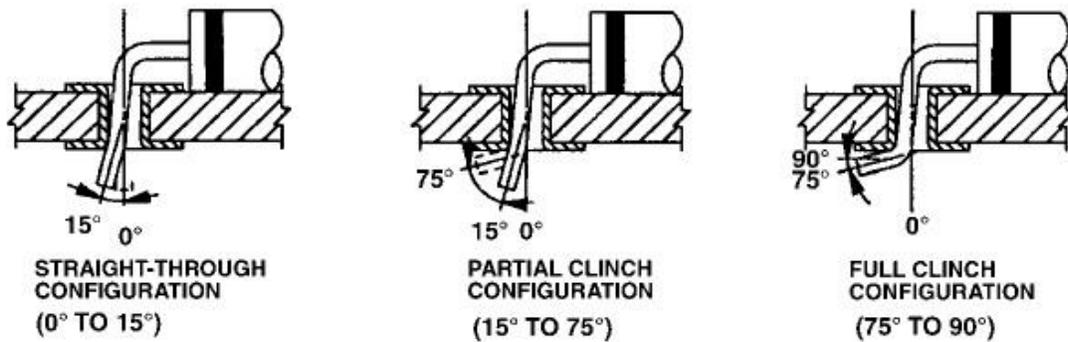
Through-Hole Mounting Methods Axial-leaded components should never be mounted with the spacing between the body and the board surface more than 2.0 mm. If the component requires spacing beyond 2.0 mm, the component should be mechanically secured or attached to the board surface using adhesives. When the component spacing is too high (above 2.0 mm), there is not sufficient strength within the solder connection to ensure the appropriate level of reliability unless other means (mechanical attachment or adhesives) are used. The component leads should be formed using equipment with form/cut dies that determine the final lead form and assure proper spacing. The use of mechanical holding devices or adhesives is usually a design requirement and should be included on the assembly drawing.
